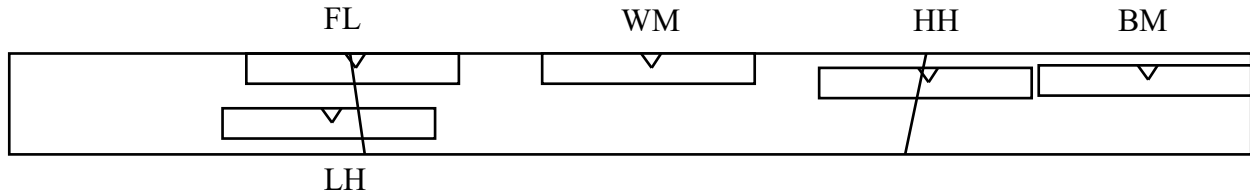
Arrangement of mini-Charpy specimens in the welded joint blanks
